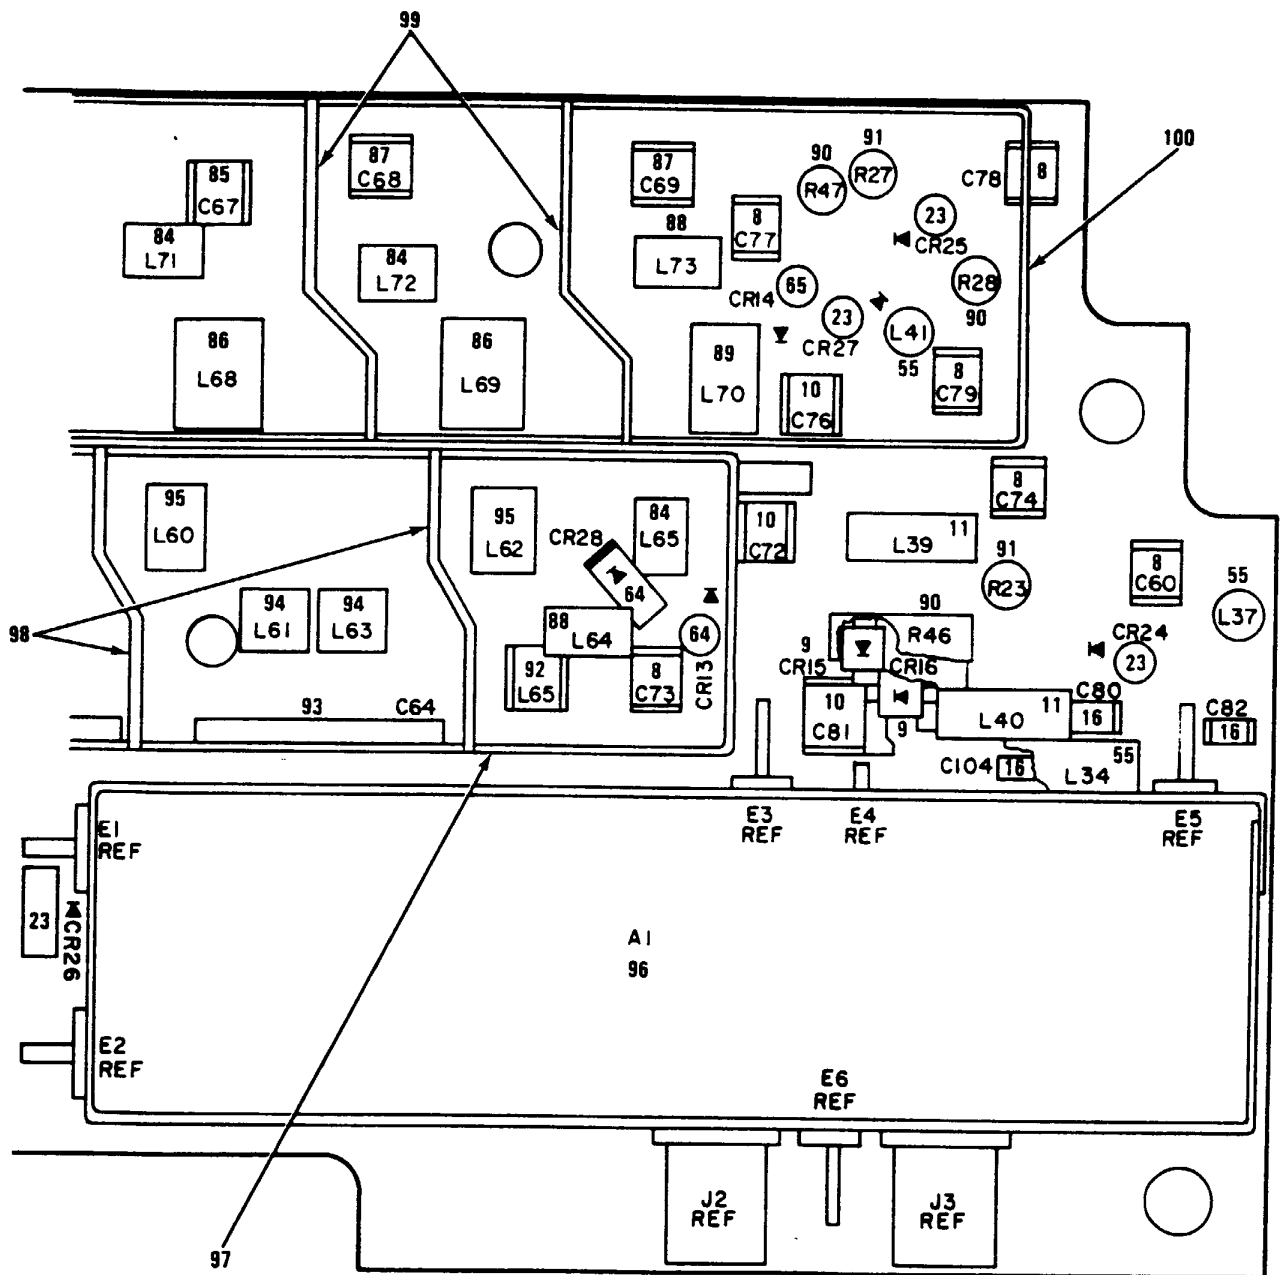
Transmitter Circuit Card Assembly (Sheet 2 of 4)
